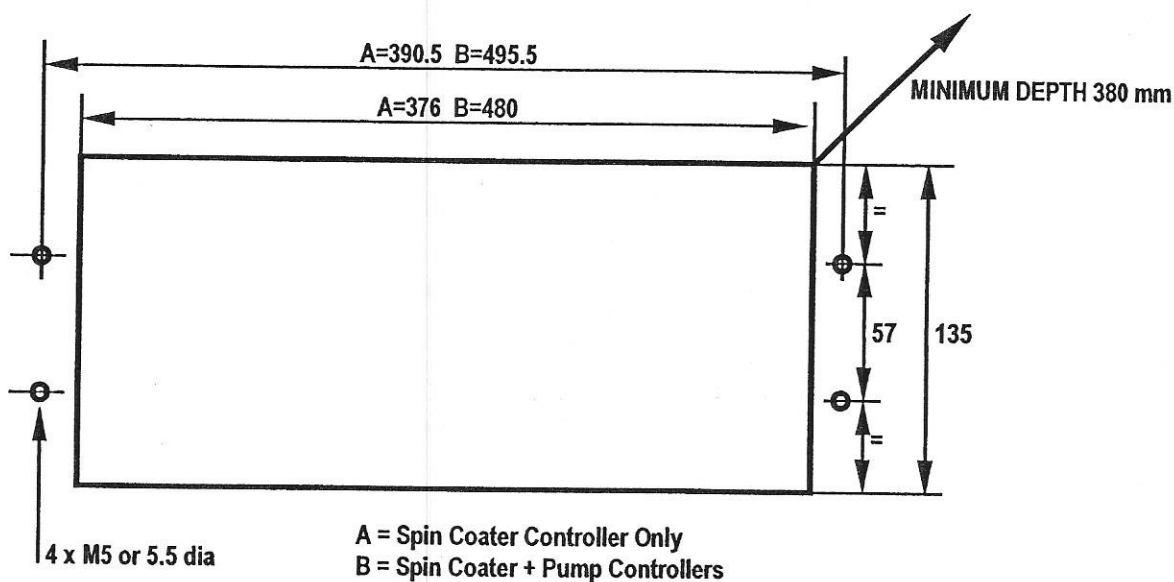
The Dimensions of the Spin Coater Controller Cabinet
